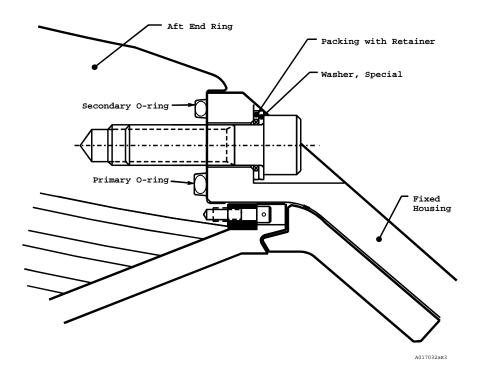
Fixed Housing-to-Aft End Ring Joint Packing with Retainer
